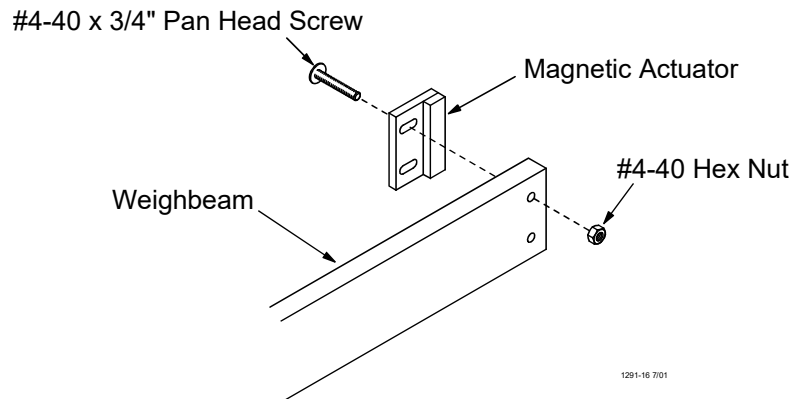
Mounting the Magnetic Actuator on the end of the Weighbeam
